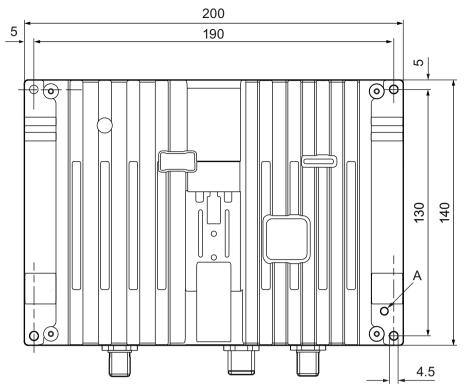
Drilling pattern for the RF290R (dimensions in mm)
